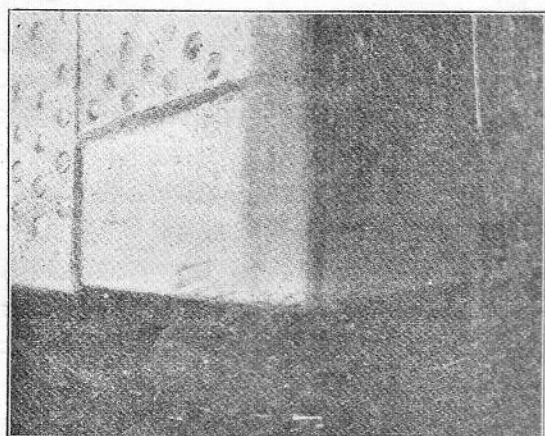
A Built-up and Welded Structure replacing a Hull Casting 40 lb. Plates, internally stiffened by welded Webs.
